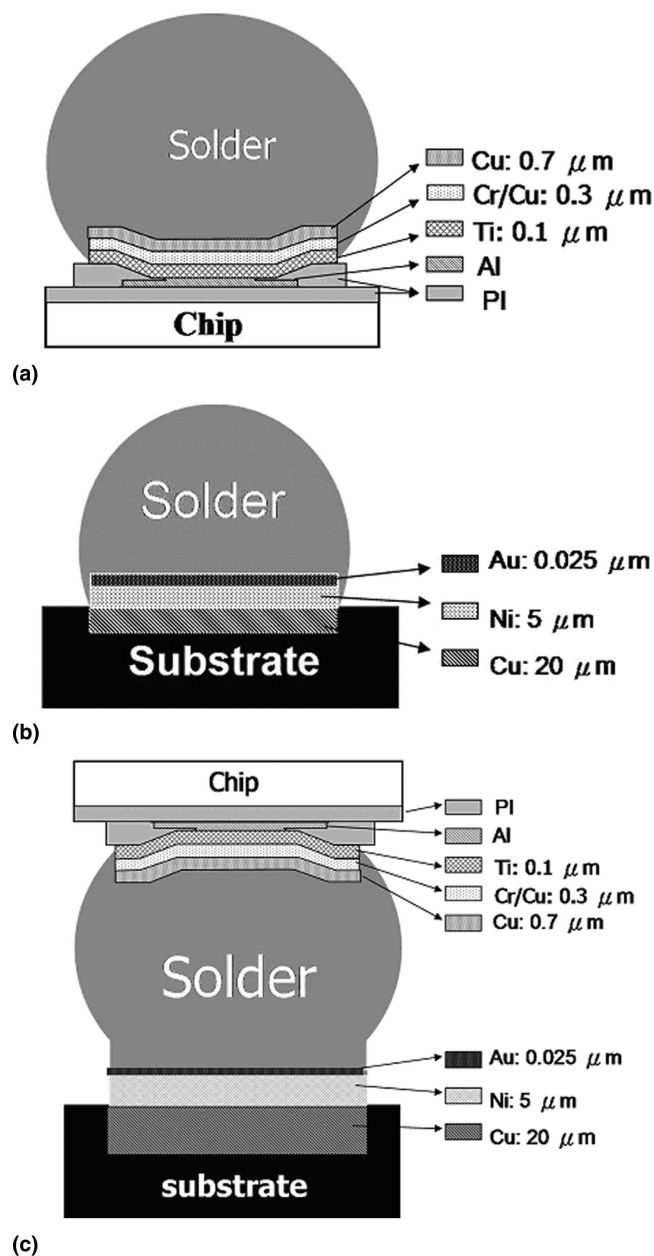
Schematic illustration of the different sets of test samples used in this study: (a) bumped die, (b) bumped substrate, and (c) flip chip package.
